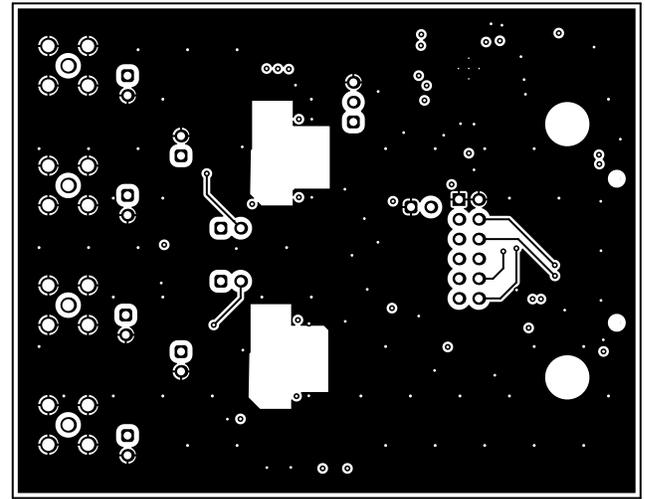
ADS8354EVM PCB Layer 4: Bottom Layer
